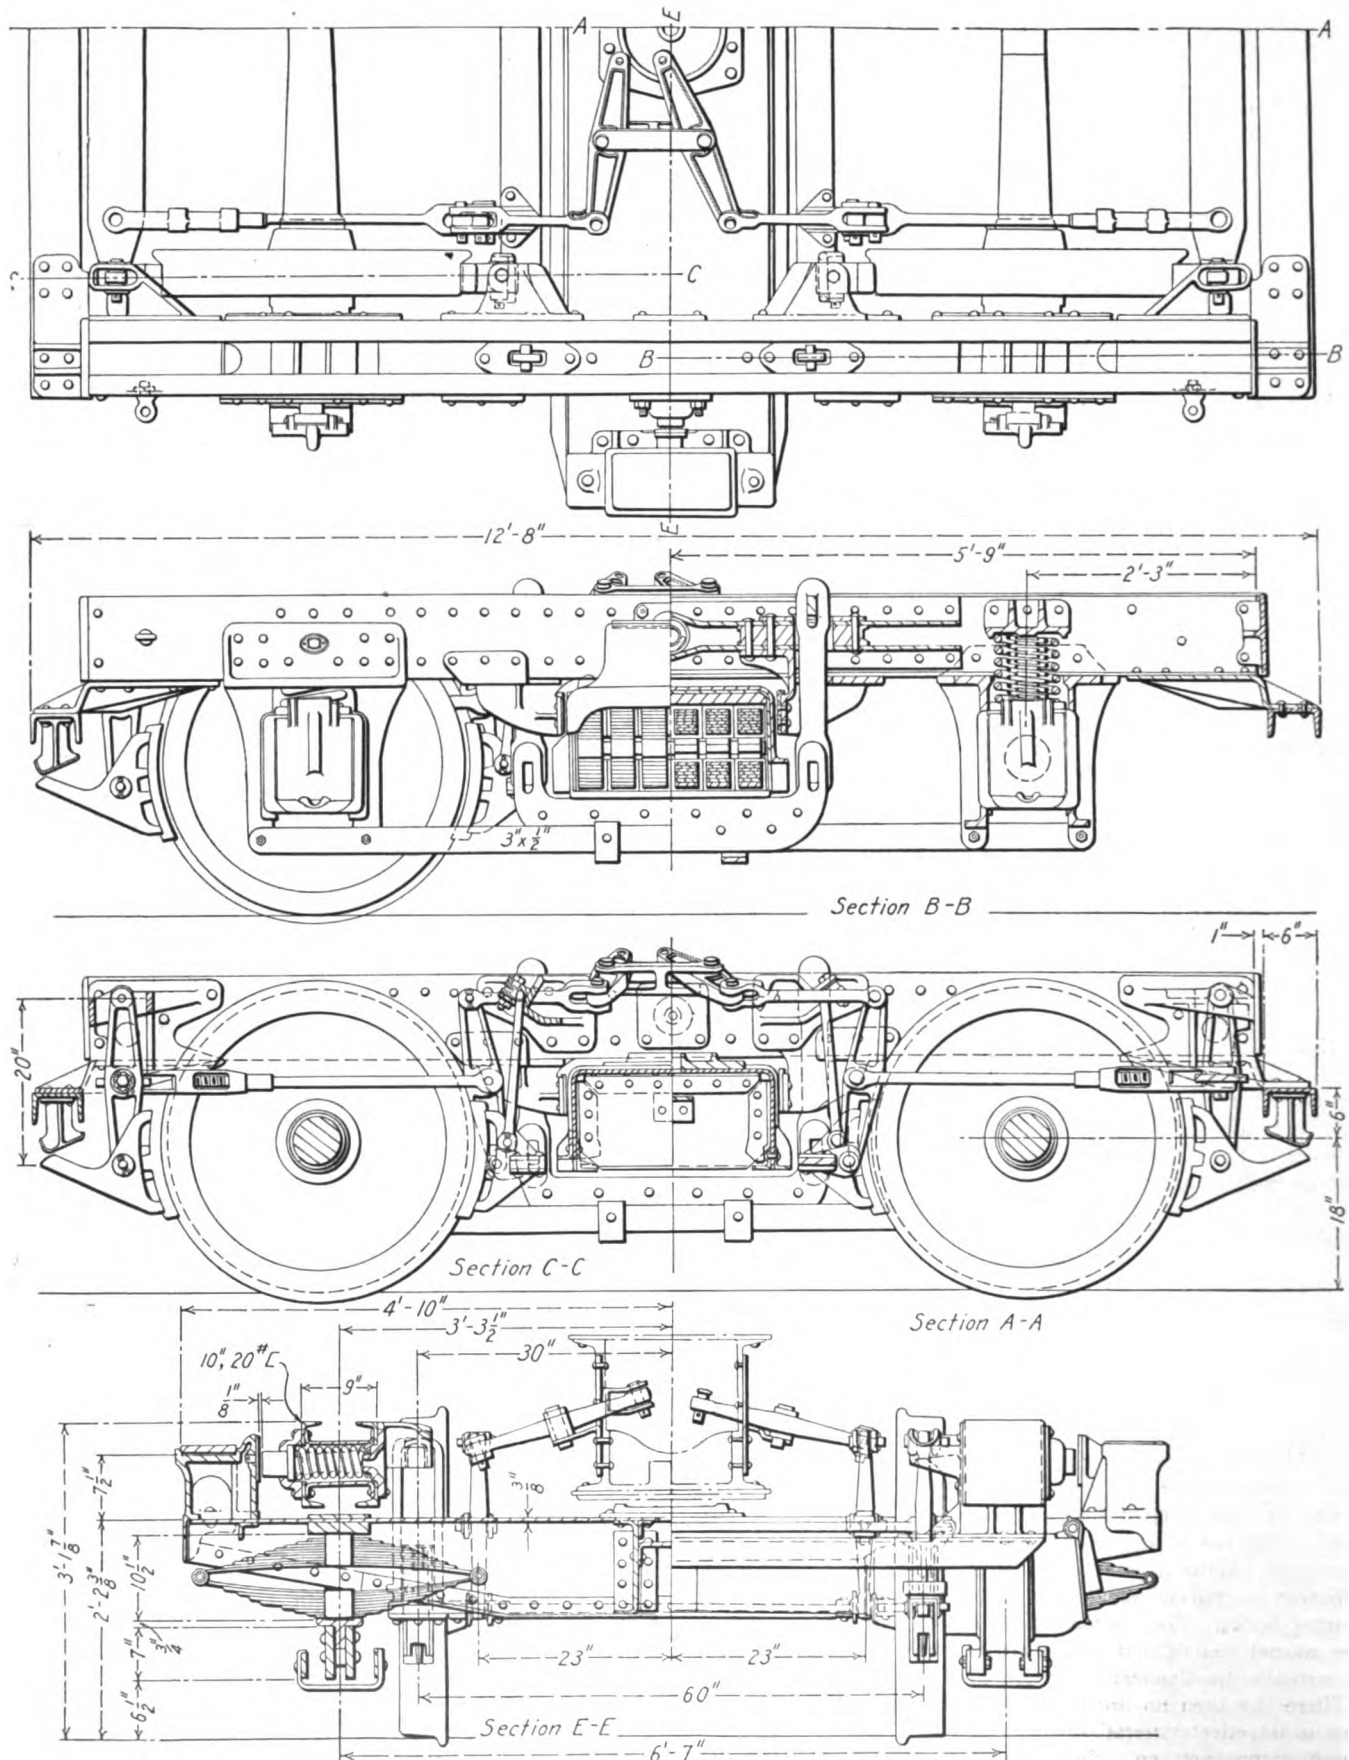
Original Four-Wheel Steel Passenger Car Truck with Clasp Brakes Applied; Pennsylvania Railroad
